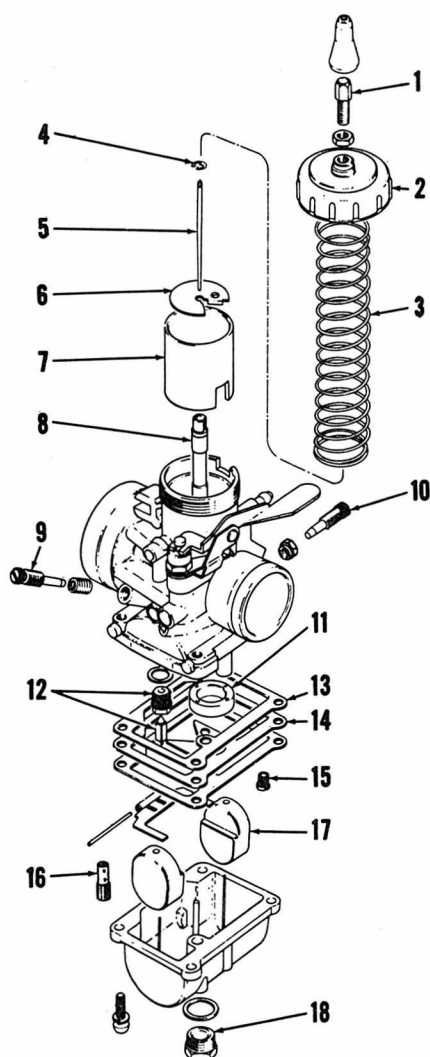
Exploded view of carburetor used on TM 400R.
